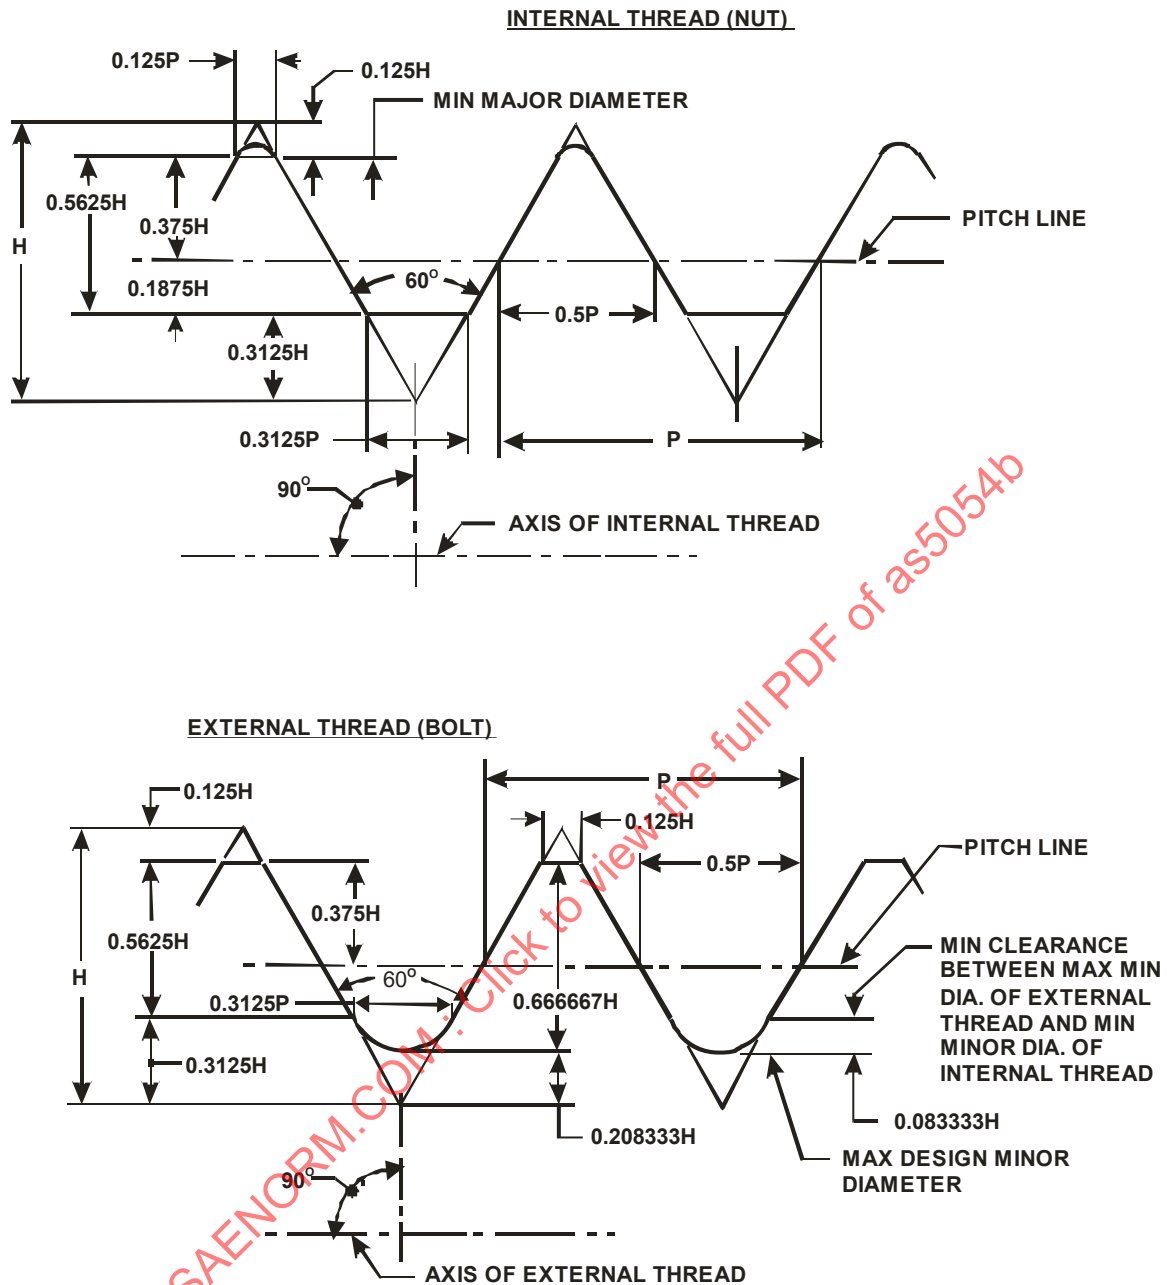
Controlled Radius Root Screw Thread (UNJ) Design Forms
